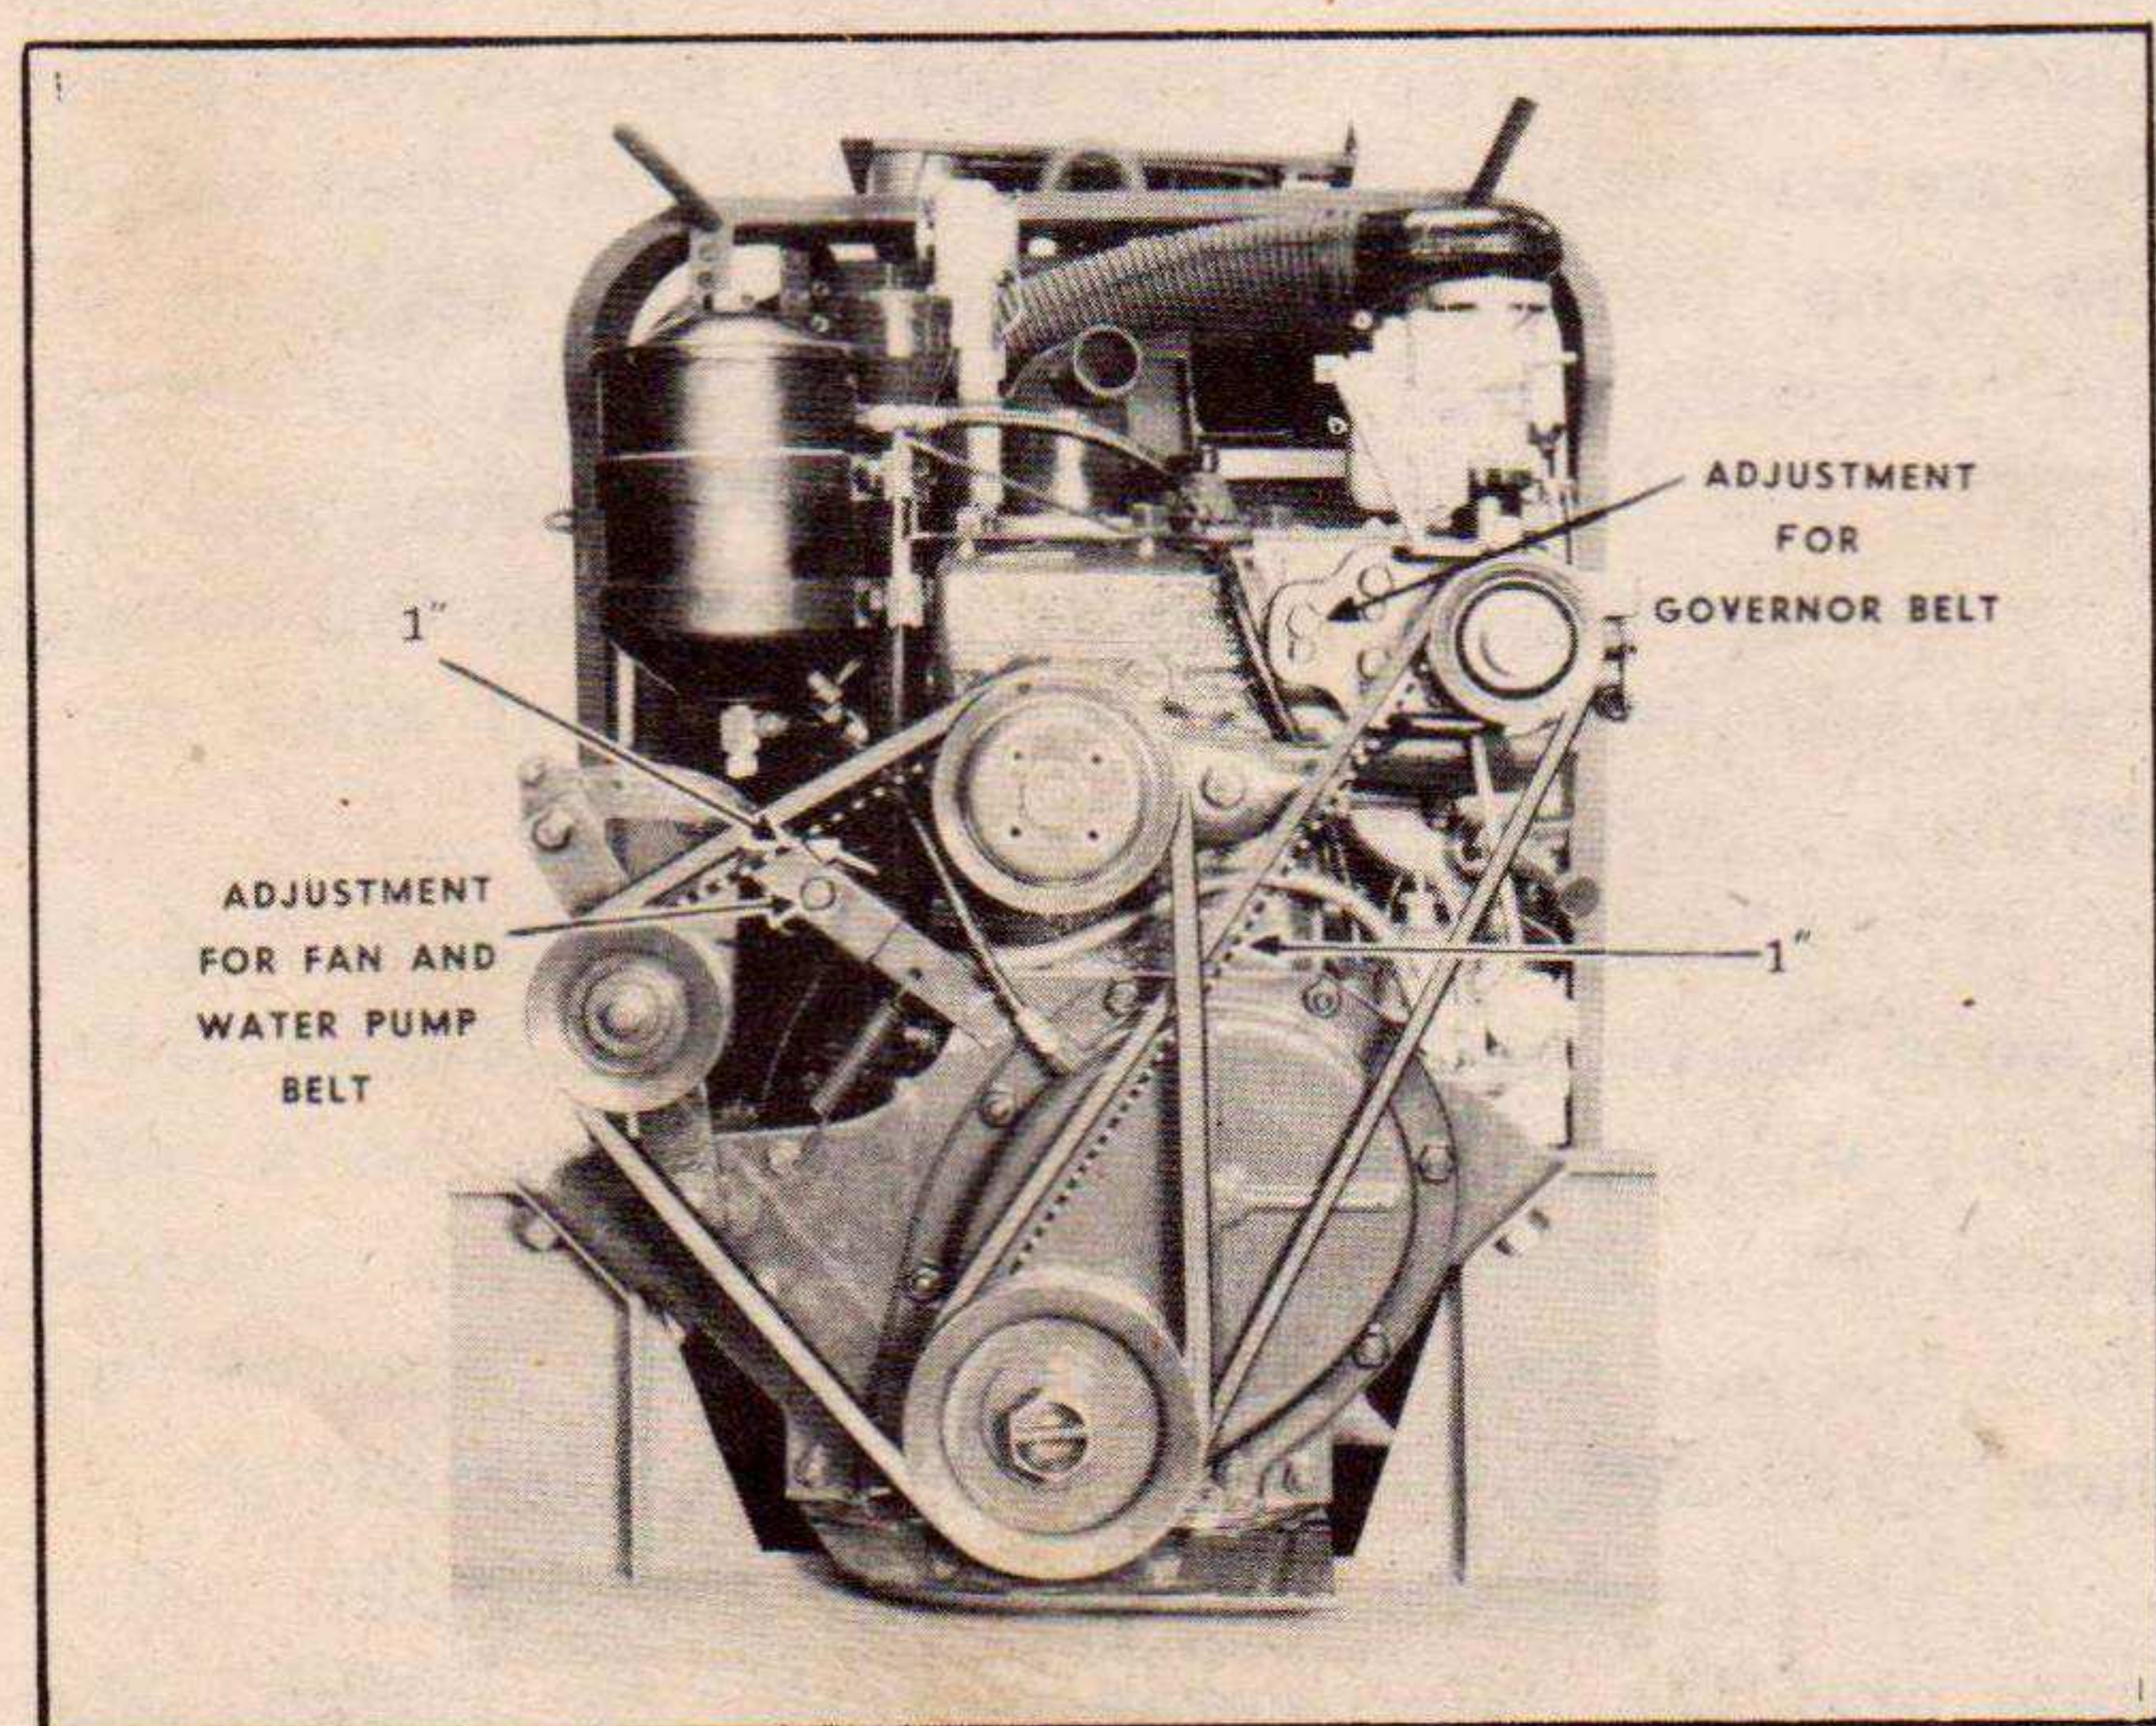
FAN AND GOVERNOR BELT ADJUSTMENTS
